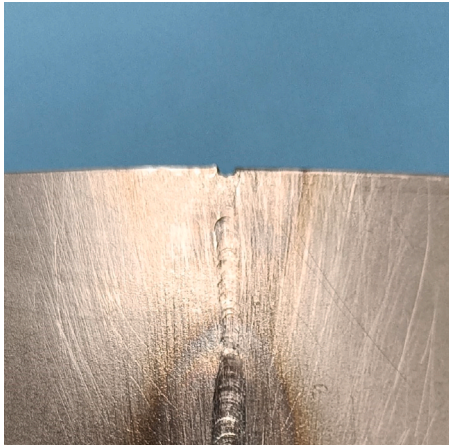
Edge imperfection at the weld of shell Z1S4.
